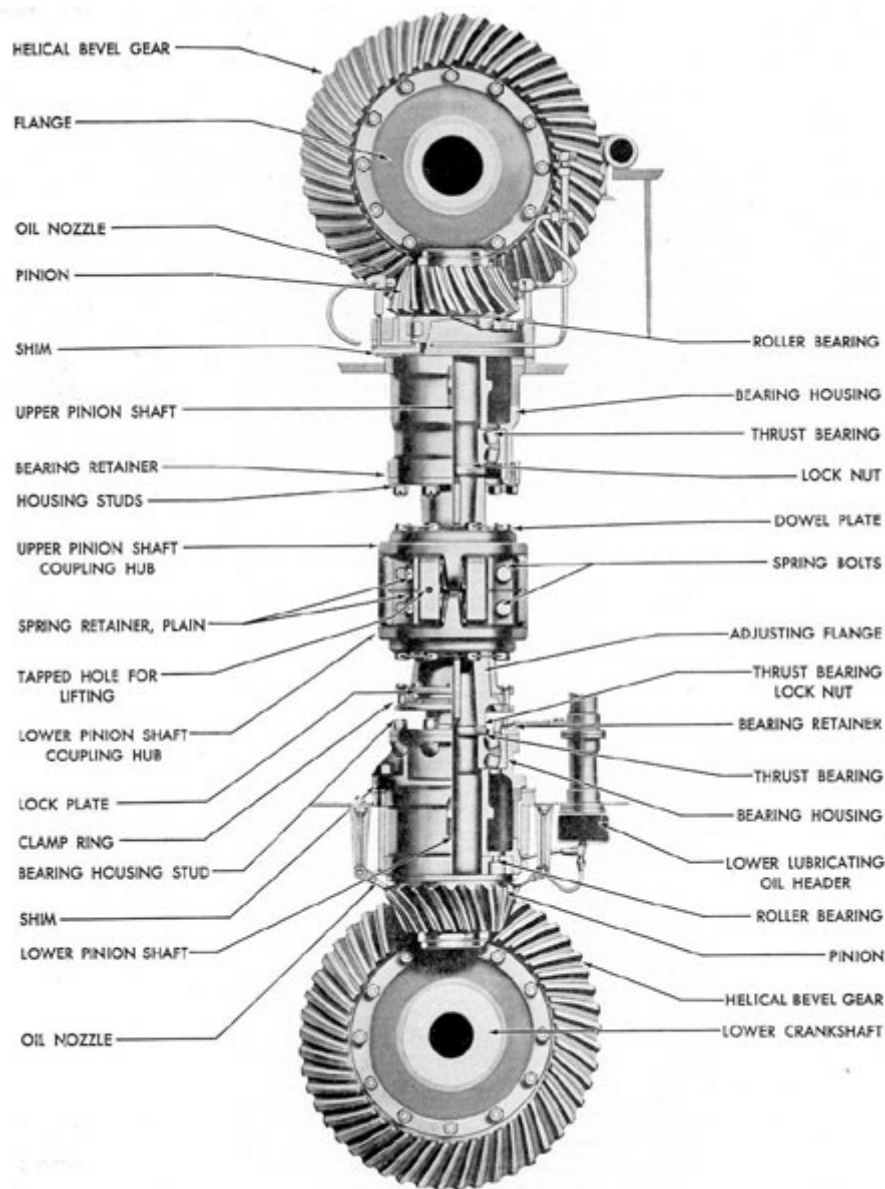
Assembled view of crankshaft vertical drive on 10-cylinder F-M engine.
